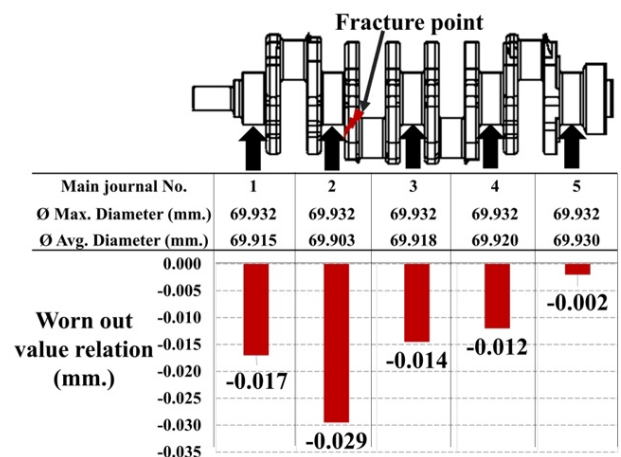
Main journal diameter worn-out inspection of the broken crankshaft
